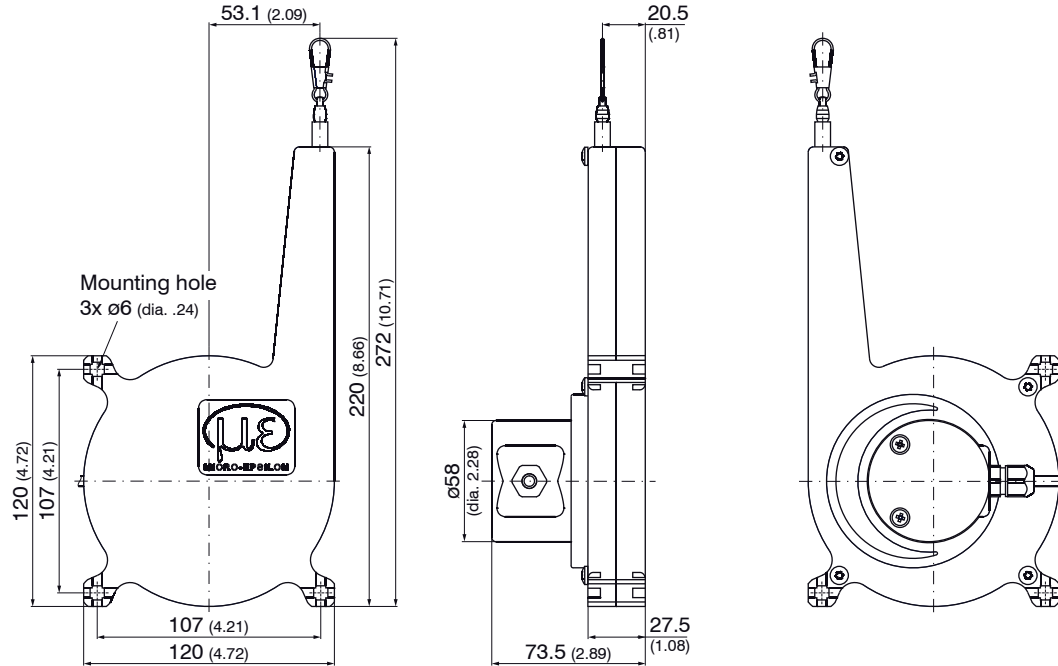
Dimensional drawing WPS-...-MK120-CR, measuring ranges 7500 mm, dimensions in mm (inches), not to scale
